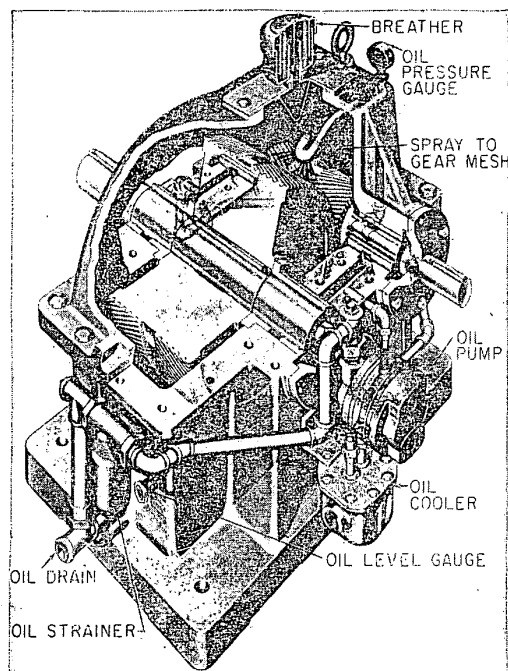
High-speed industrial gearset with forced-feed lubrication system. (Courtesy of Westinghouse Electric Corporation, Pittsburgh, Pa.)
